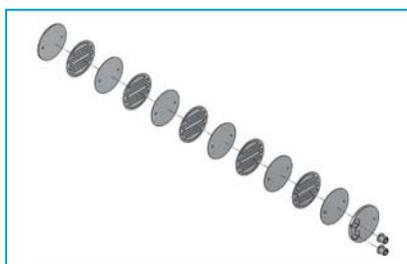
Multilayer wafer column. Column length 1 meter demonstrating the construction of the wafers.
